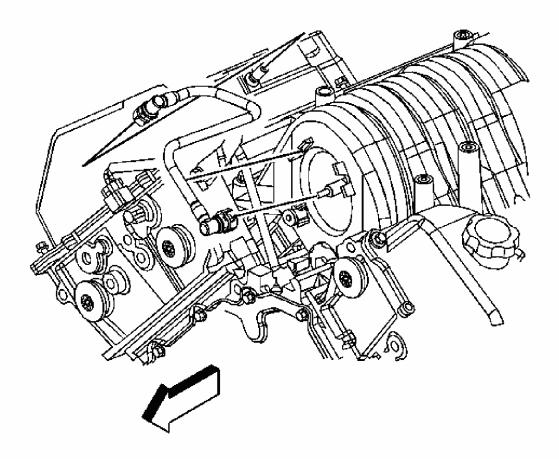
Identifying PCV Foul Air Tube Quick Connect Fitting Courtesy of GENERAL MOTORS CORP.
